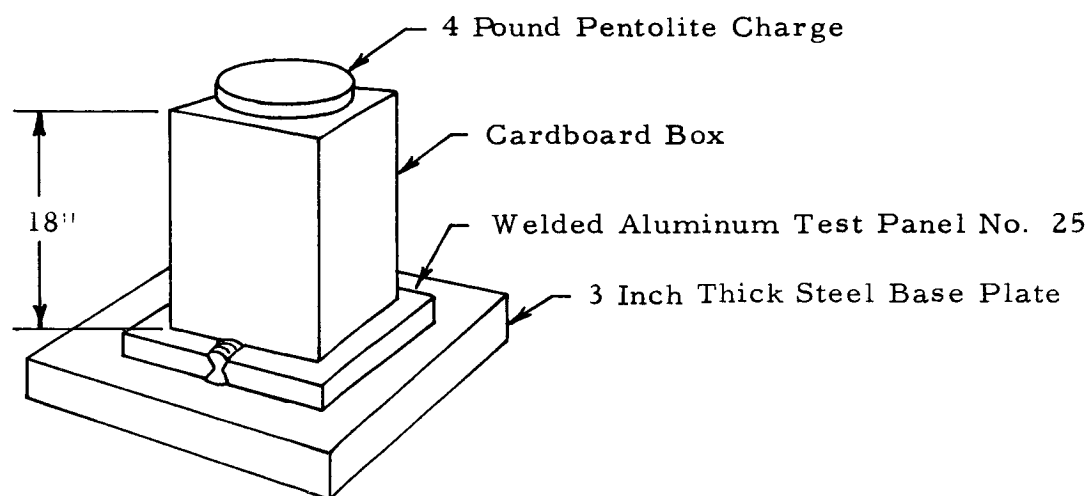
EXPLOSIVE IMPACT LOADING OF BUTT-WELDED
